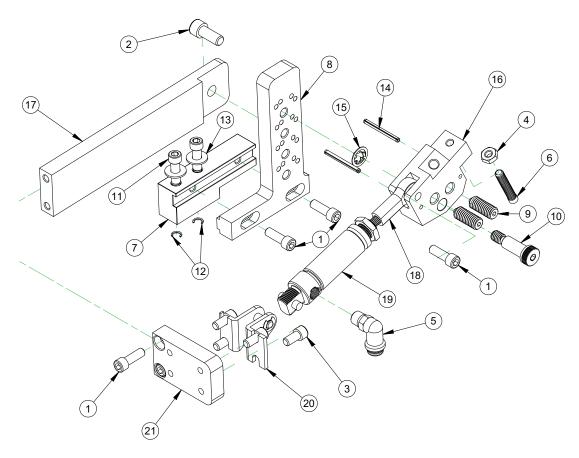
PCU ASSEMBLY (P/N 97045)
